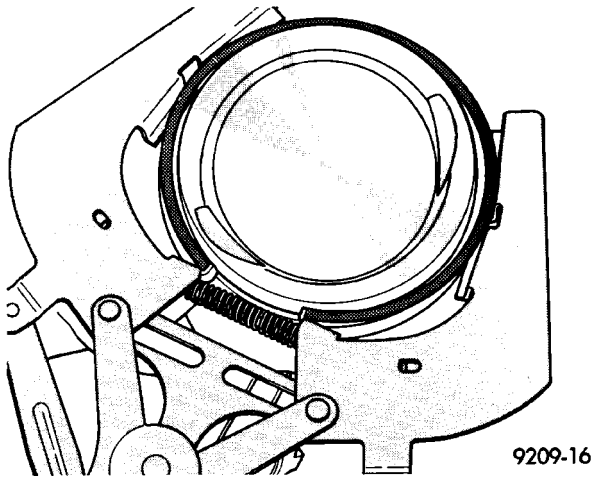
PISTON RINGS - REMOVAL/INSTALLATION
